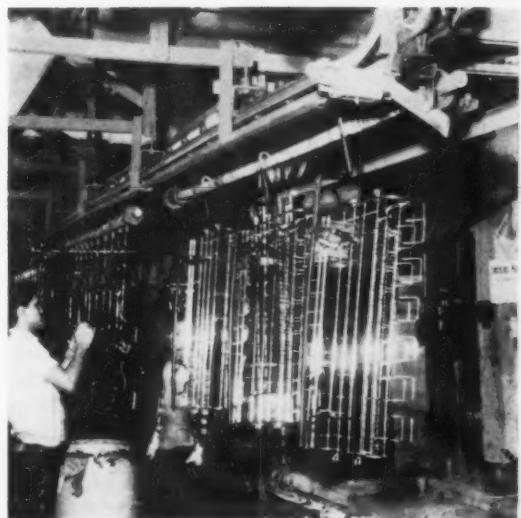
Operator is shown transferring 10 racks of finished work from final hot rinse to overhead conveyor for removal of work and re-racking.
